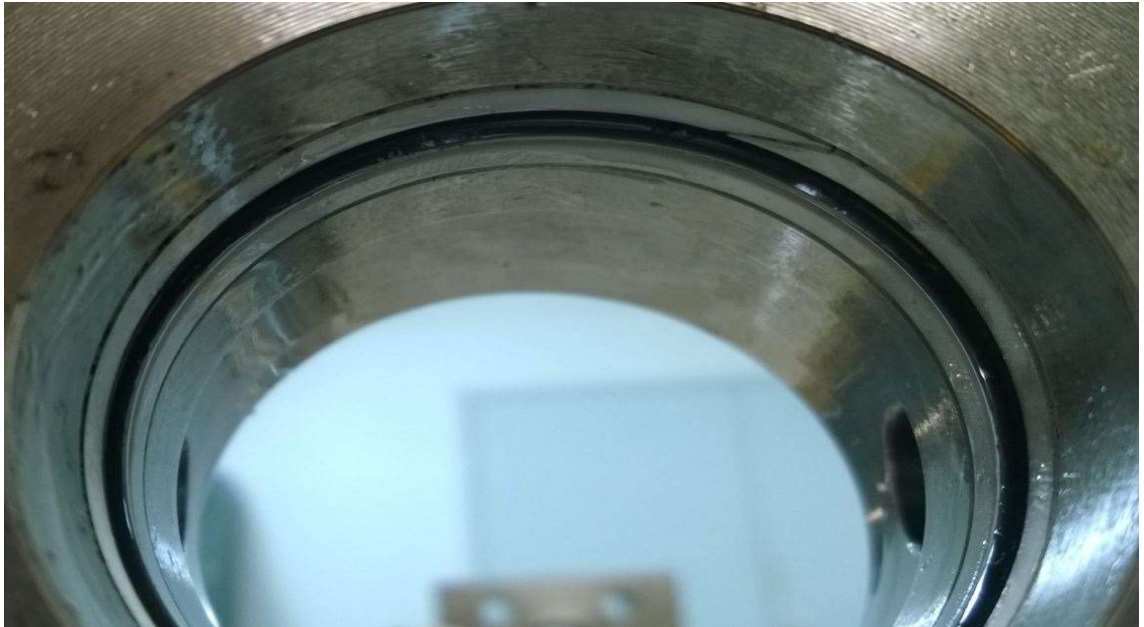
shows the O-ring 2 of manufacturer 2 after endurance test. Some rubber crumbs are visible due to abrasion. The mass loss of the O-ring is 0.9 % which is much less than that of the O-rings of manufacturer 1.
